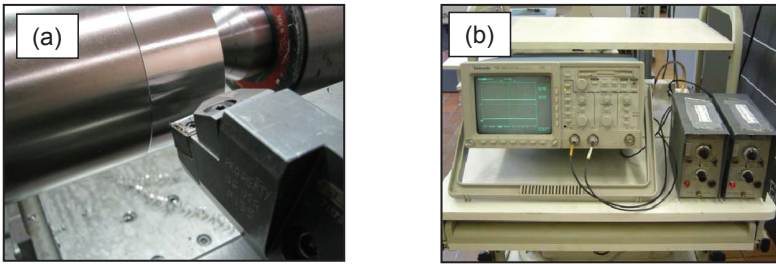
Experimental setup for machining verification. (a) Machining setup (b) Dynamometer complete with oscilloscope for recording cutting forces.
